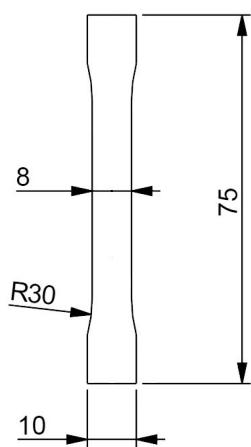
Tensile specimen geometry according to EN-ISO 527
